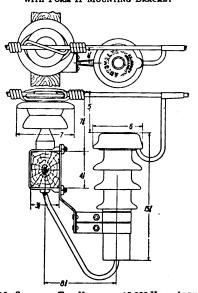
Side and Top Views of 15,000-Volt Arrester with Form C Mounting Bracket and Pierce Clamp Pin
